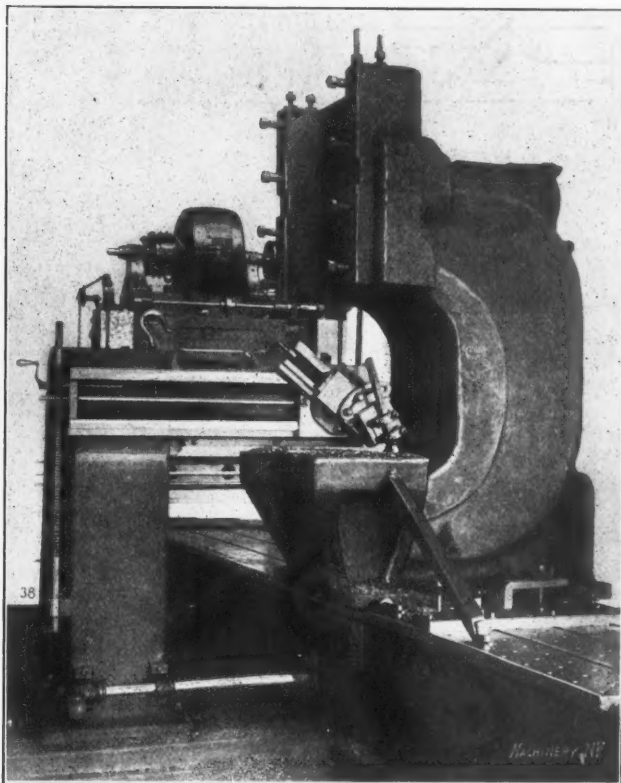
Planing the Lower Jaw of a 16,000 pound Shear Casting
